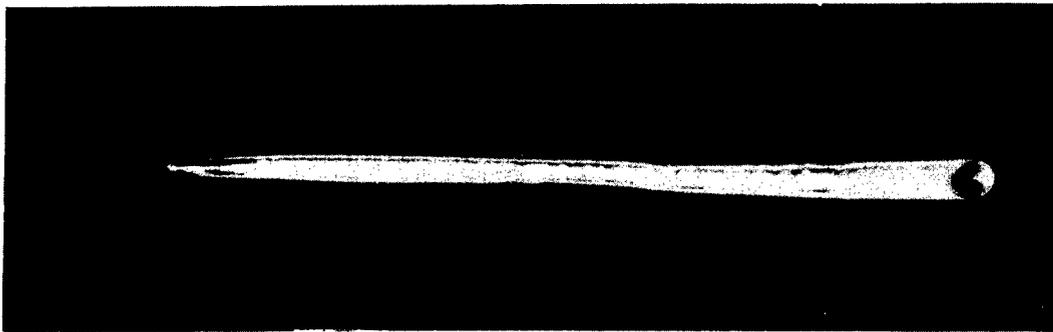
SAMPLE AG11 ANNEALED 1/2 HR. 1200°C BEFORE WELDING.
